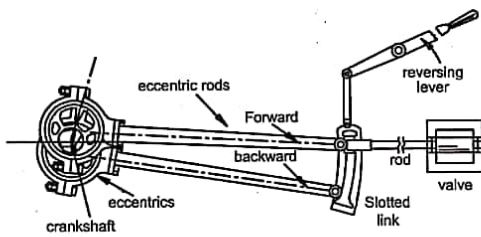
(a) Stephenson link gear for a reversing engine
